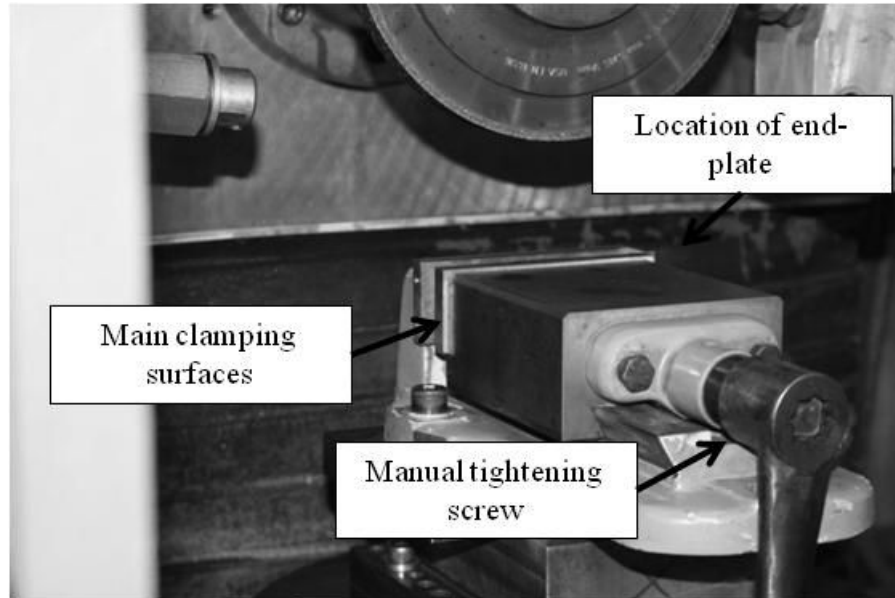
Photograph showing detailed view of work-holding arrangement for surface grinding trials
